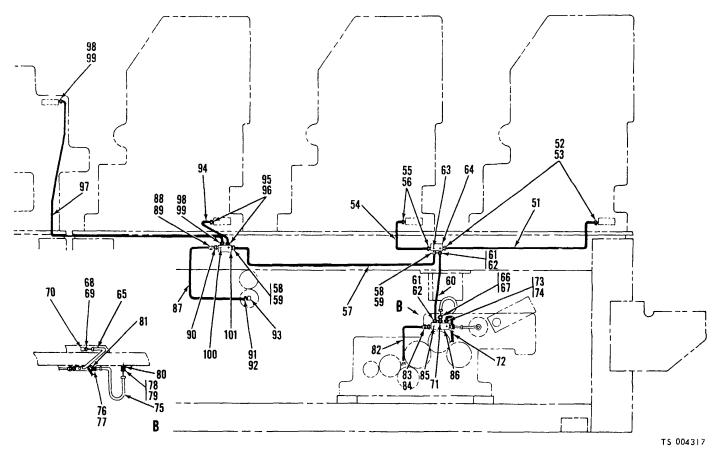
Operator side and feeder unit oil line assembly (sheet 2 of 2). 4-20
